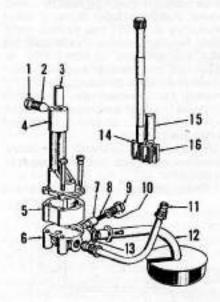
Exploded view of all pump used on three cylinder engine showing component parts and their relative positions.
